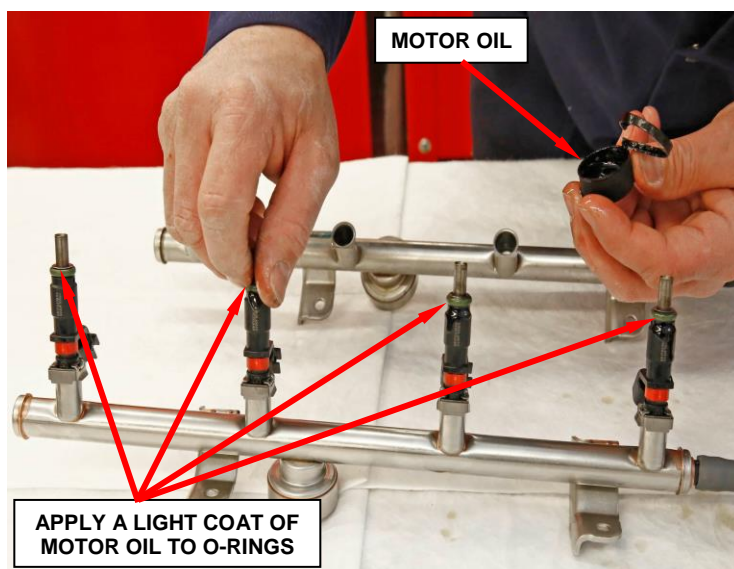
Apply a light Coat of Motor Oil onto Green Fuel Injector O-Rings
